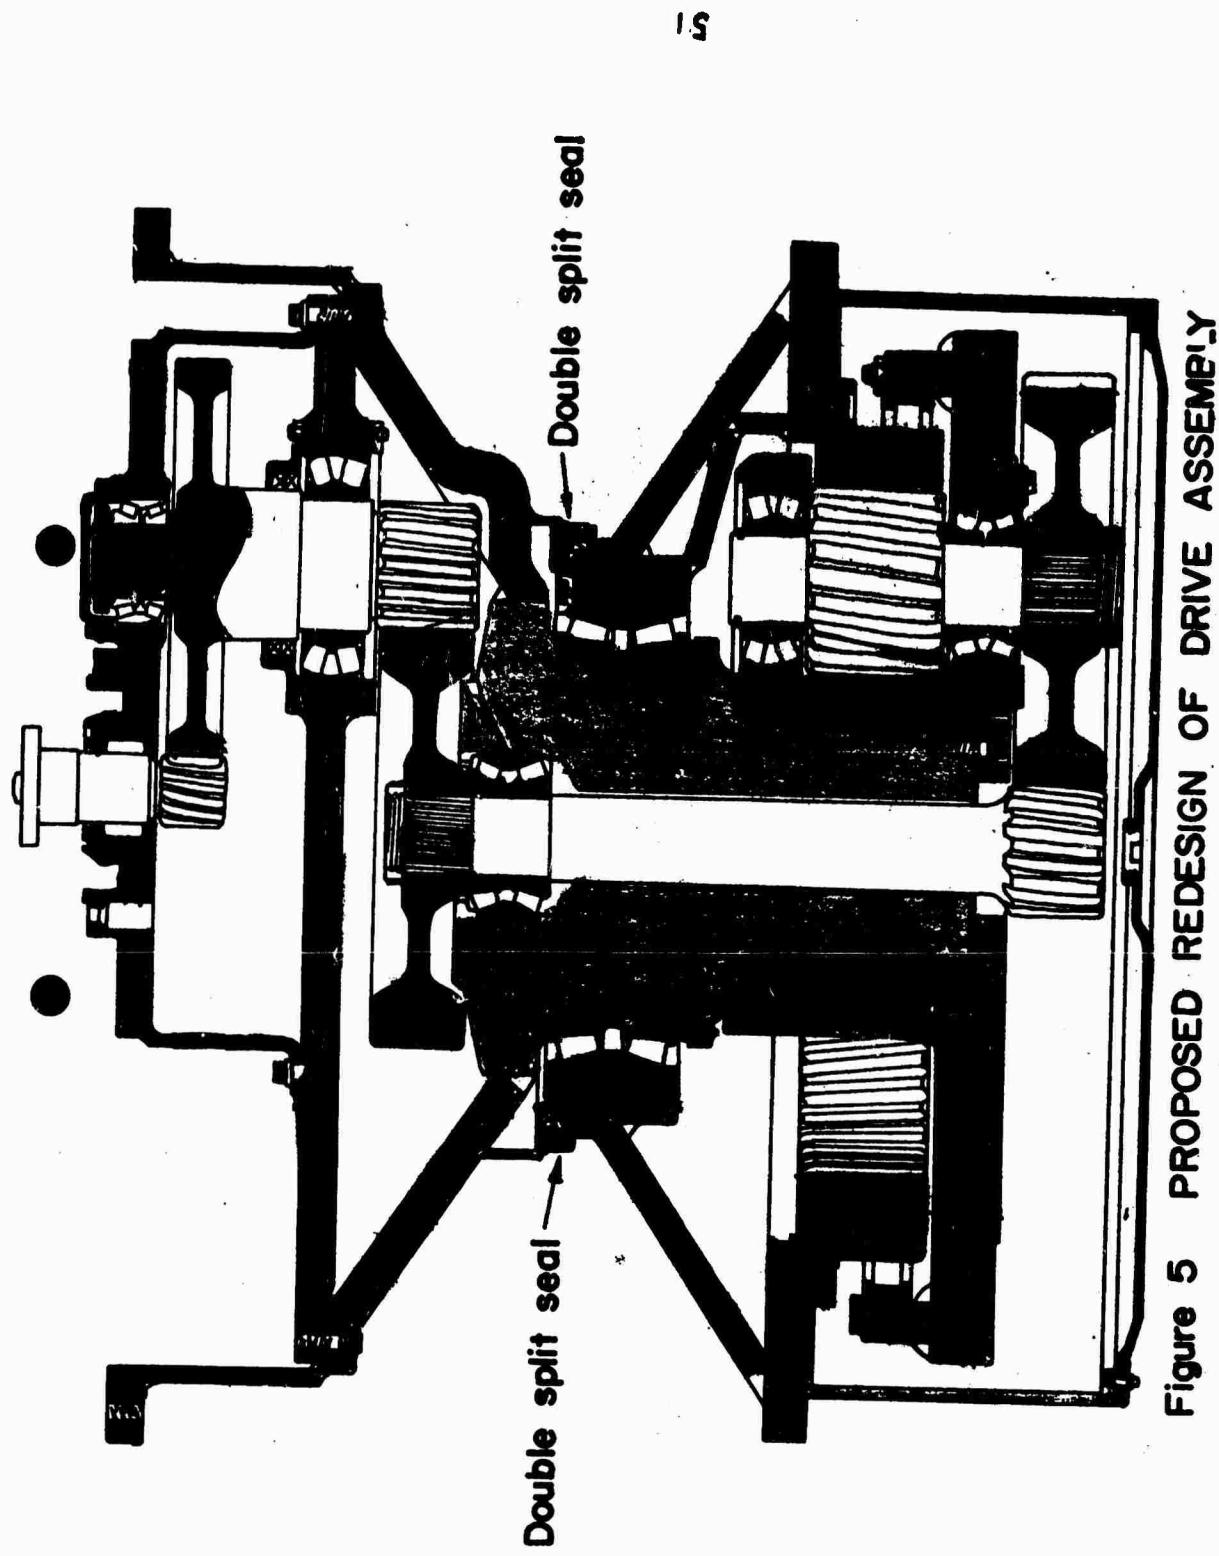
PROPOSED REDESIGN OF DRIVE ASSEMBLY
